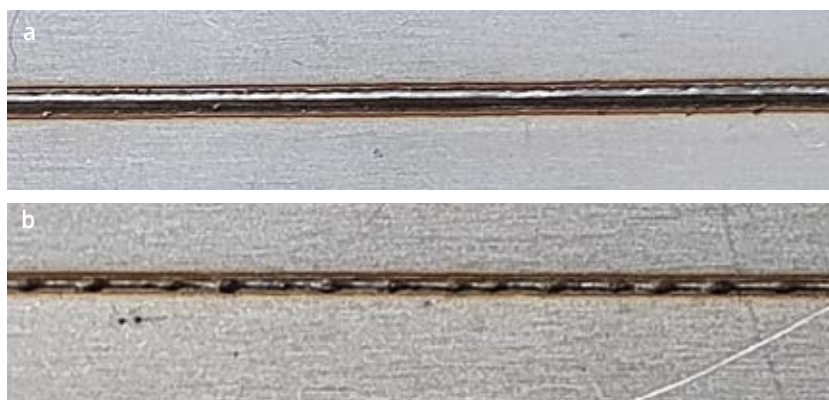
Laser welding steel with 180 (a) and 80 μm spot diameters (b) at the same speed (Source: BBW Laser Technik)
